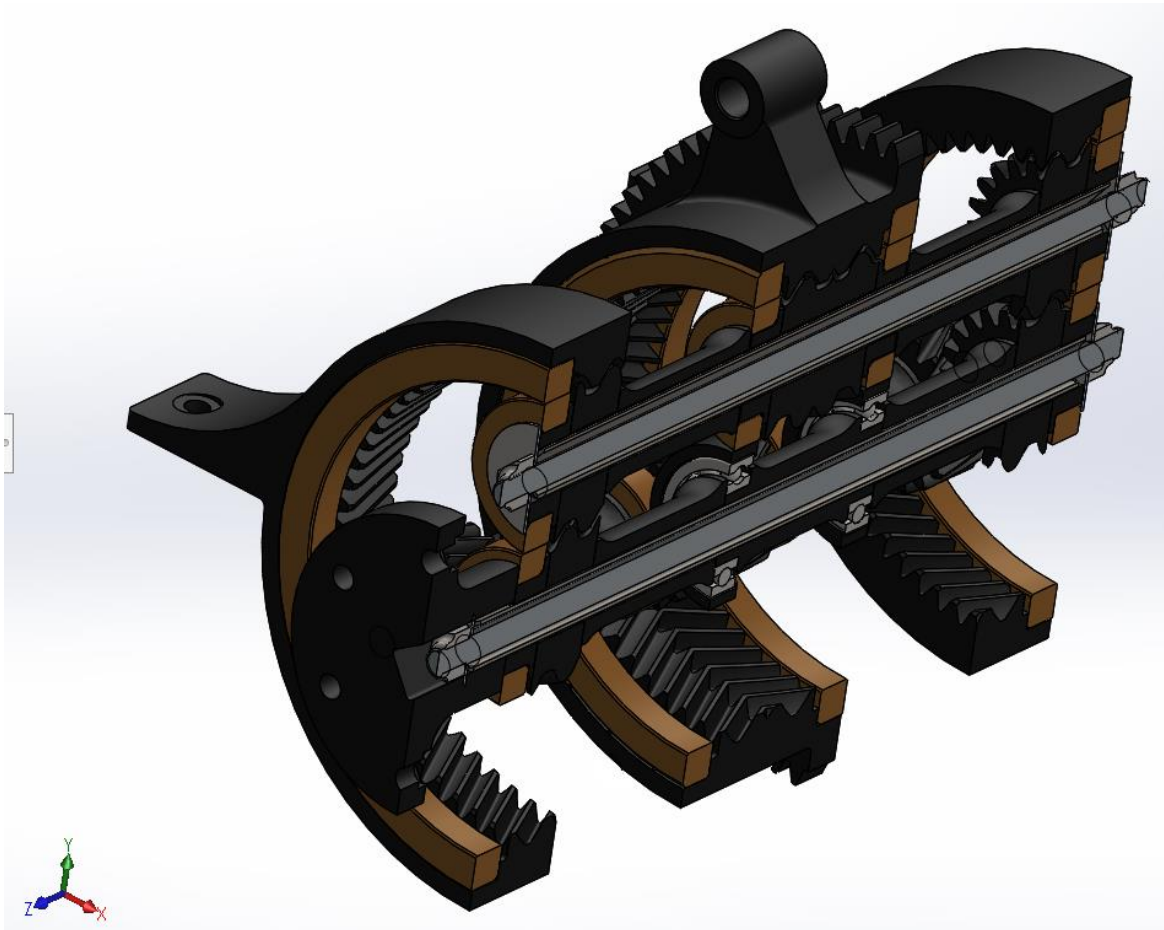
Section of the reduction gear to be produced for Additive Manufacturing
